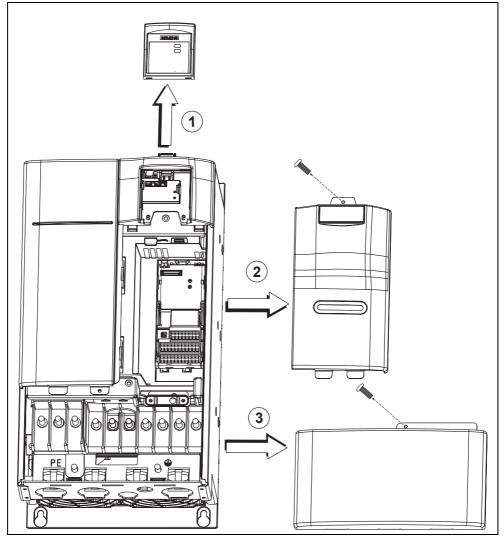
Removing front covers (Frame Sizes D and E)
